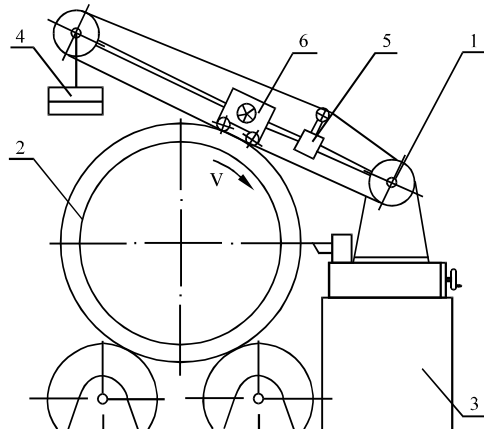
The scheme of grinding of a ball mill spindle surface placed on rollers (Shrybchenko, 2000): 1 = belt feed drive; 2 = spindle; 3 = attachable machining module; 4 = ballast; 5 = belt tensioning device; 6 = holding down device
